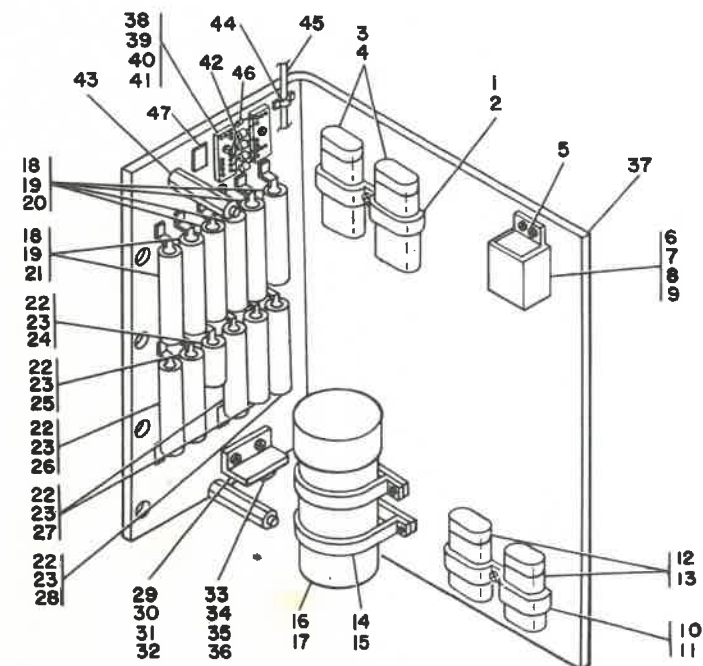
POWER PLATE ASSEMBLY. SEE LIST 11.
